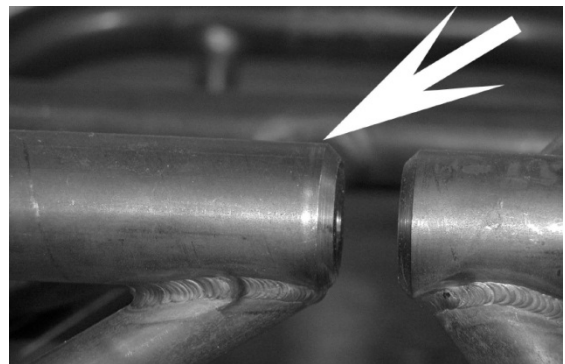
Interim redesign Engine Mount One (1) Piece Machined Foot
